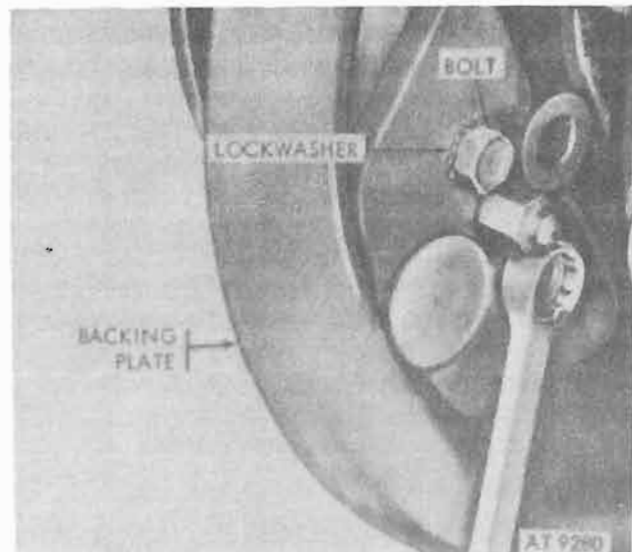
Brake wheel cylinder retaining bolts and lockwashers.
